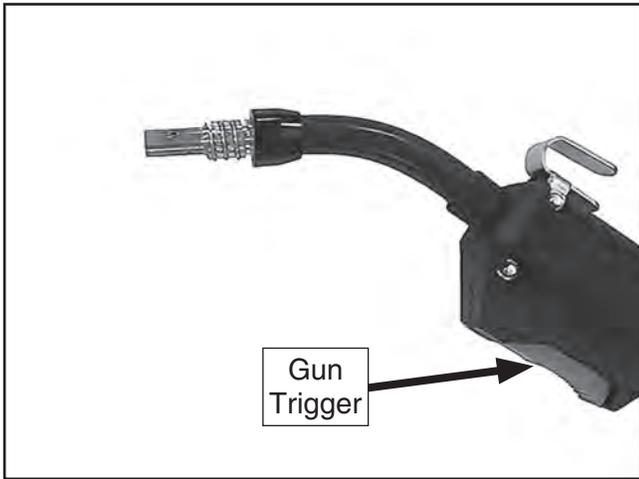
Nozzle and contact tip removed from welding gun.
